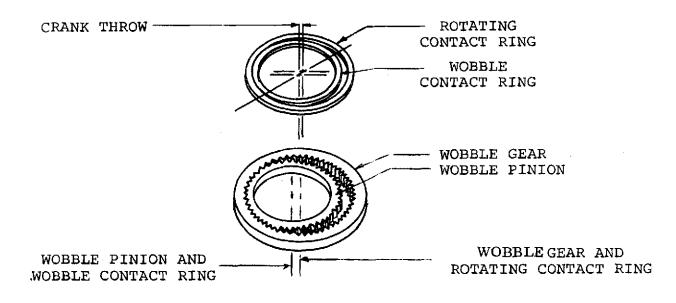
Contact Ring/Drive Gear Pair (Separated for easy viewing)
